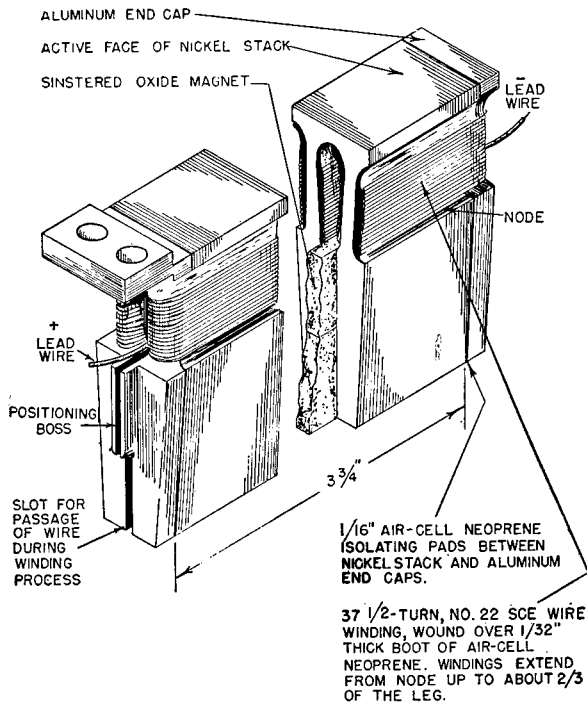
HP-3 stack as used in HP-3DS transducer.
